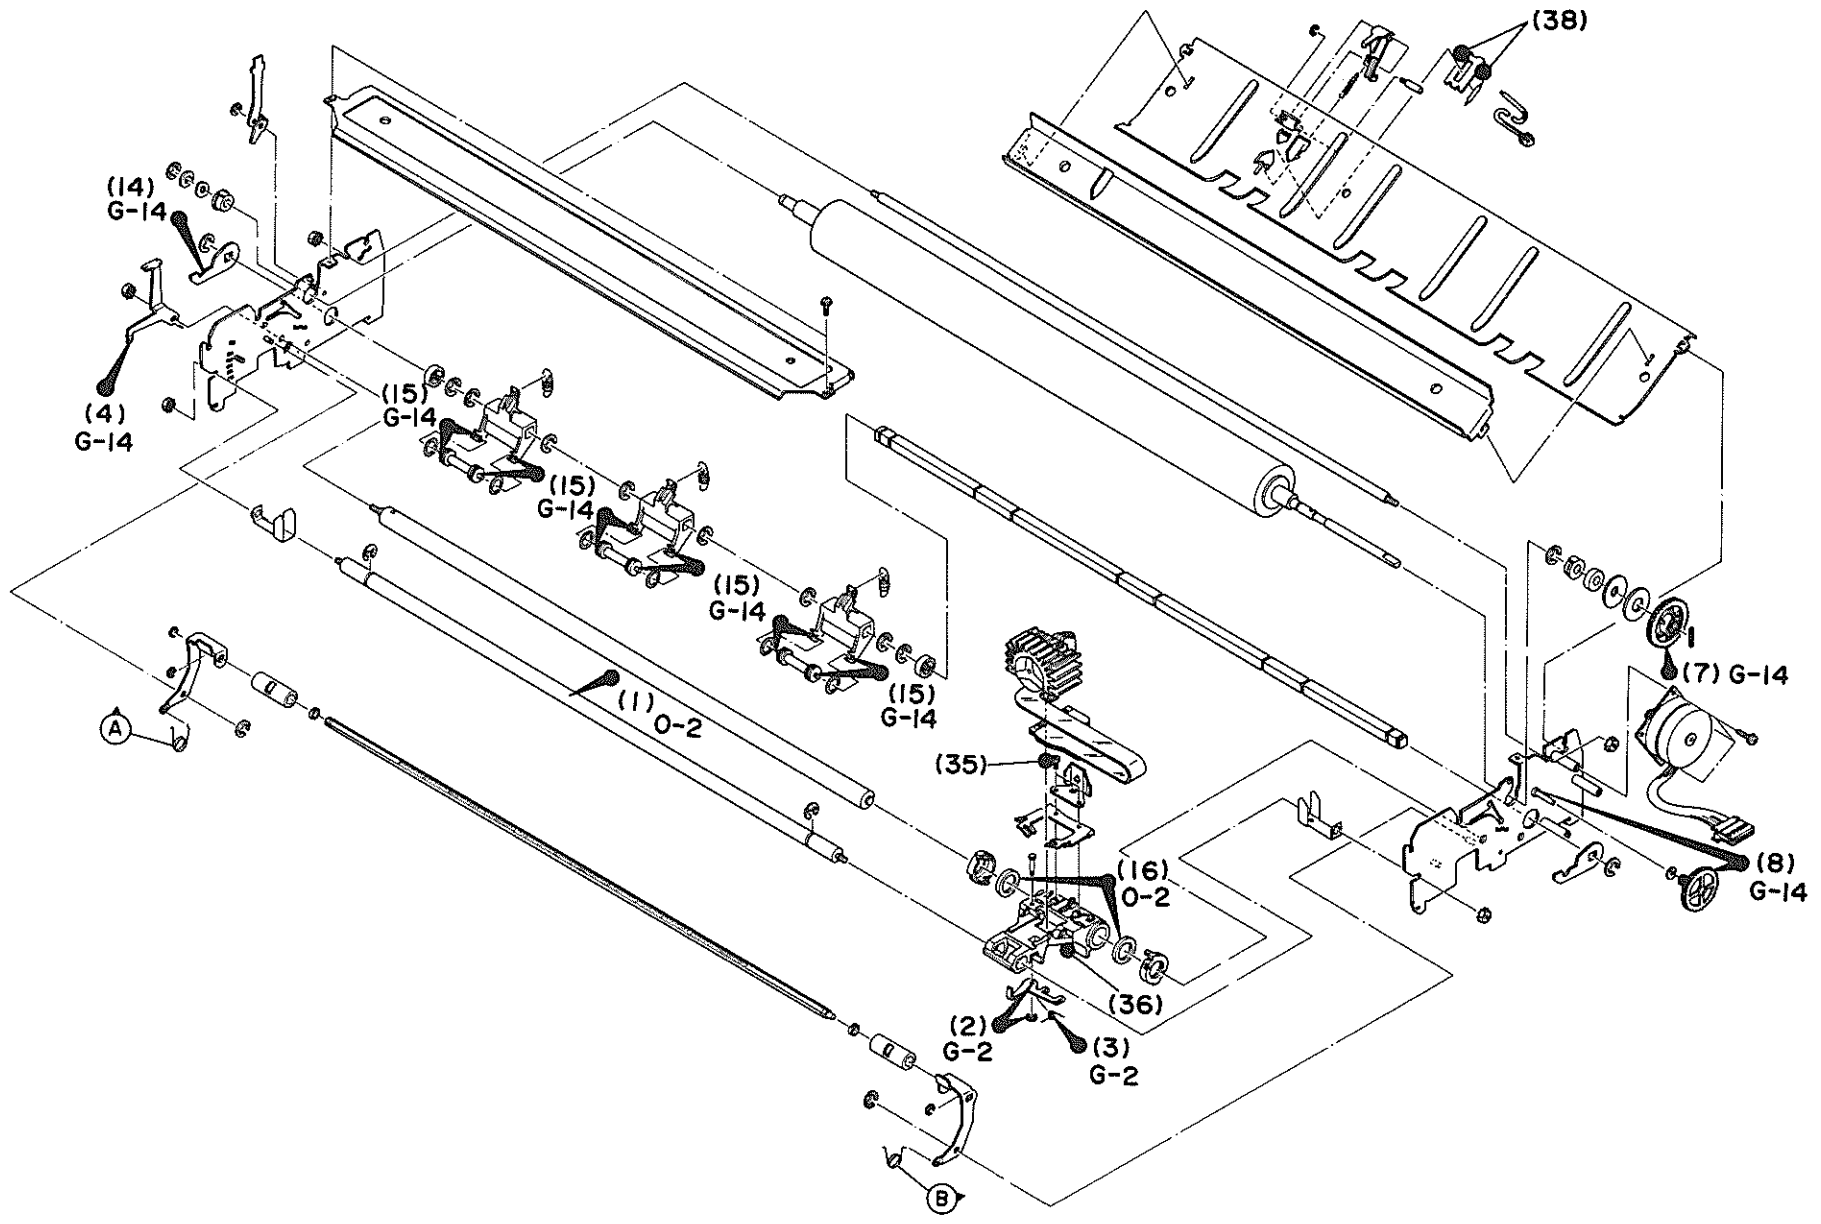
Model-3560 Lubrication and Adhesive Application Points Drawing 2
